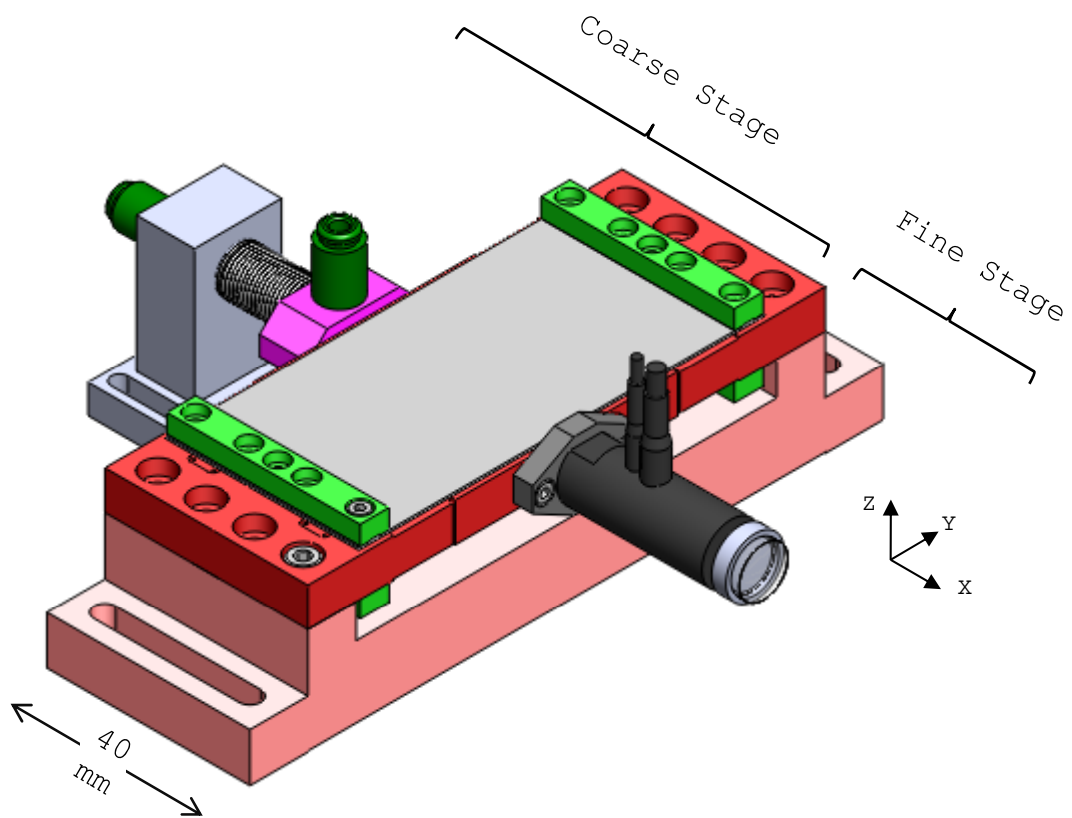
CAD design of the reticle assist device. The device consists of two sub-assemblies: a coarse approach mechanism and a fine actuation mechanism.
